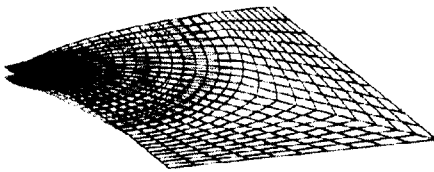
Deformed shape before and after unloading (before cutting) at the punch stroke of 7.62 mm
